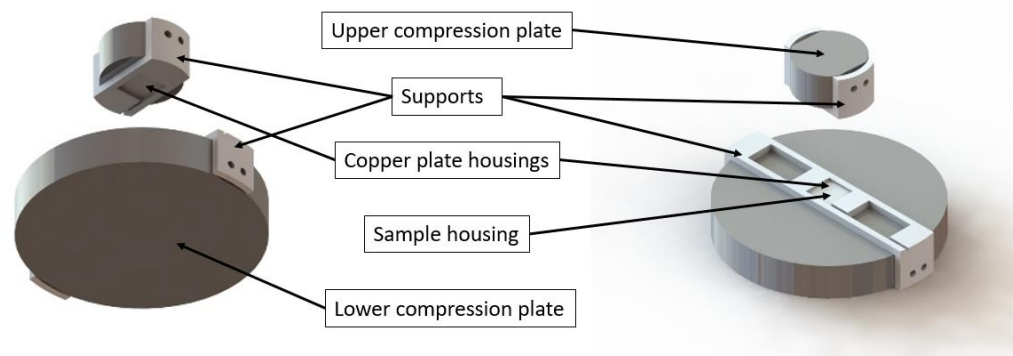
model of the assembly to the compression plates of the holders for the electrical testing.
